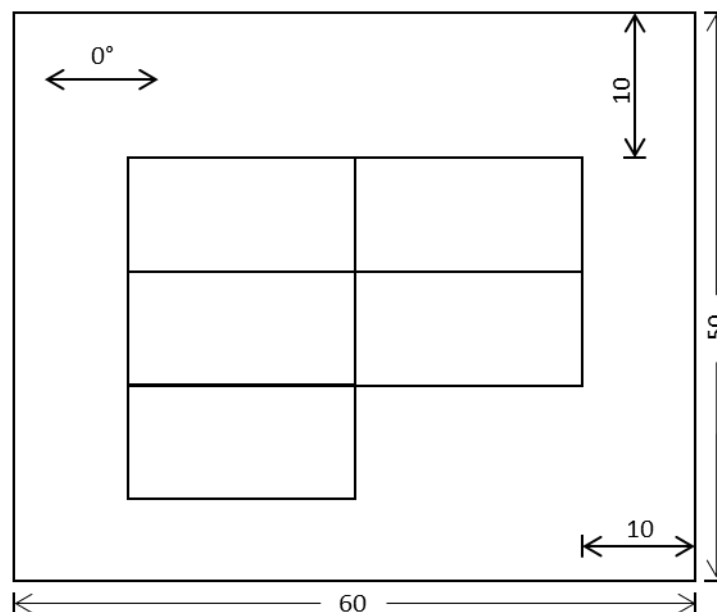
Positioning of the coupons on the test panels for interlaminar shear strength test. All dimensions are expressed in mm.
